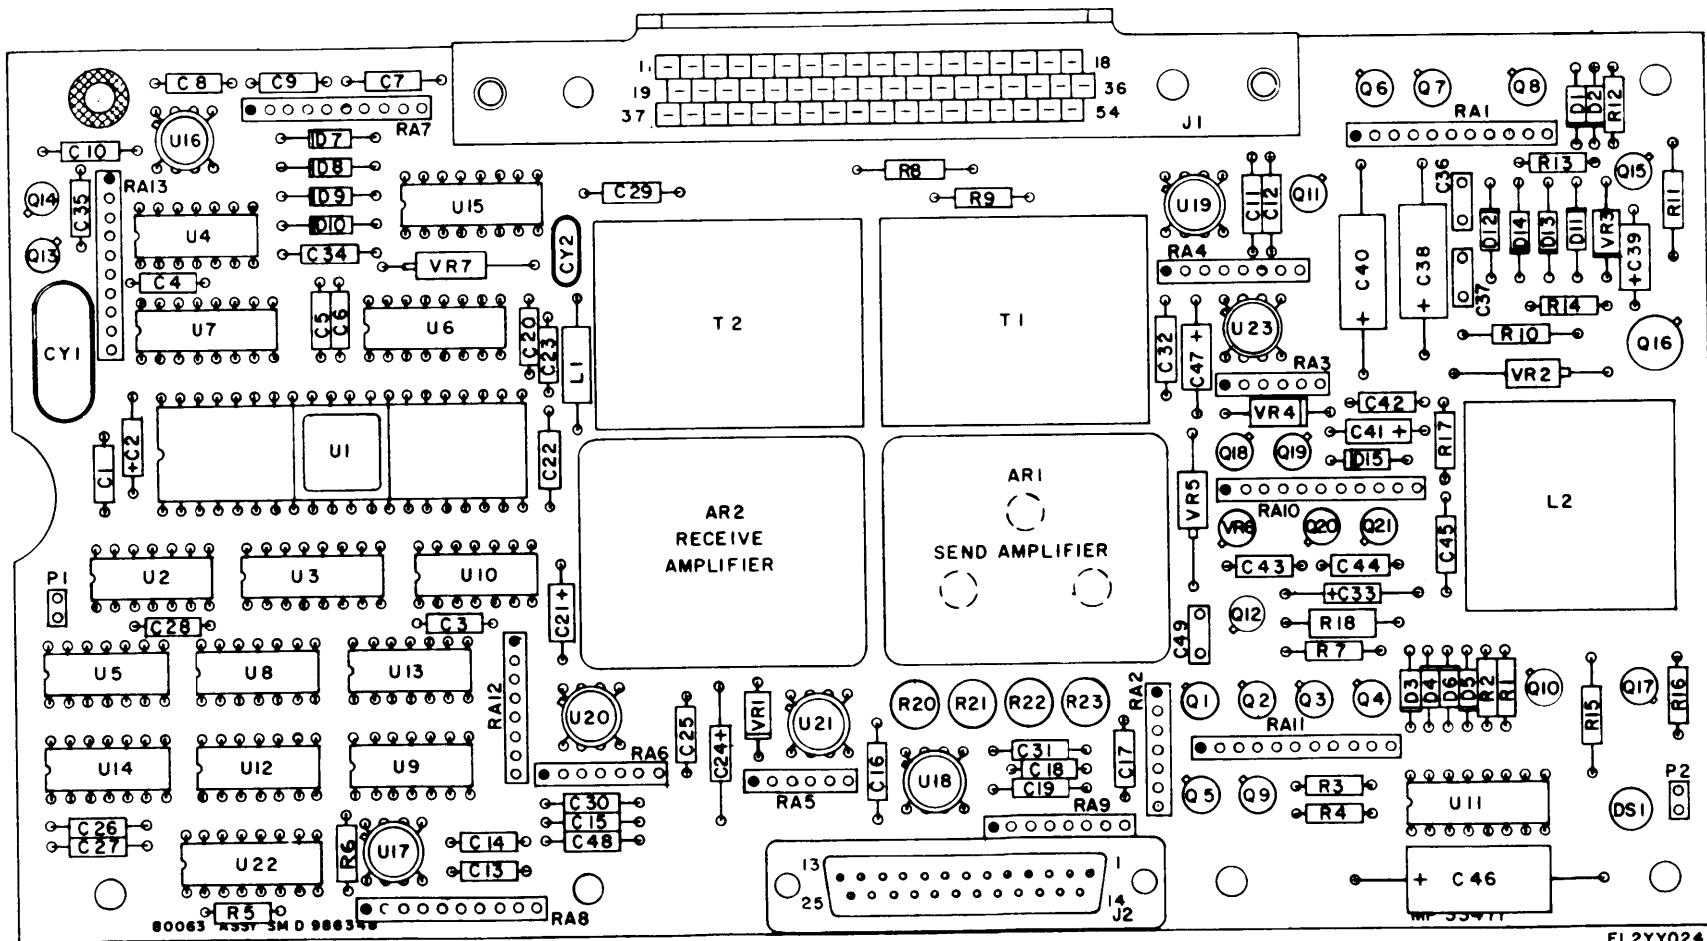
Parts location on Circuit Card Assembly (A1) for Telephone Set TA-838A/TT
